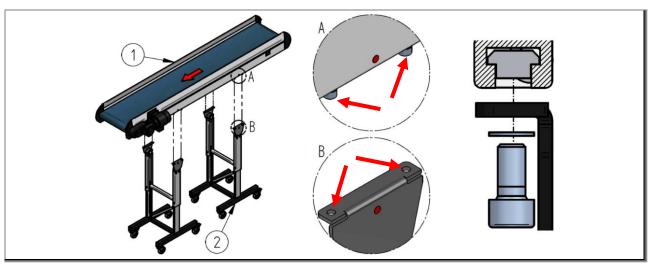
Assembly, conveyor with support HE 010 - HM 010 (typical)
